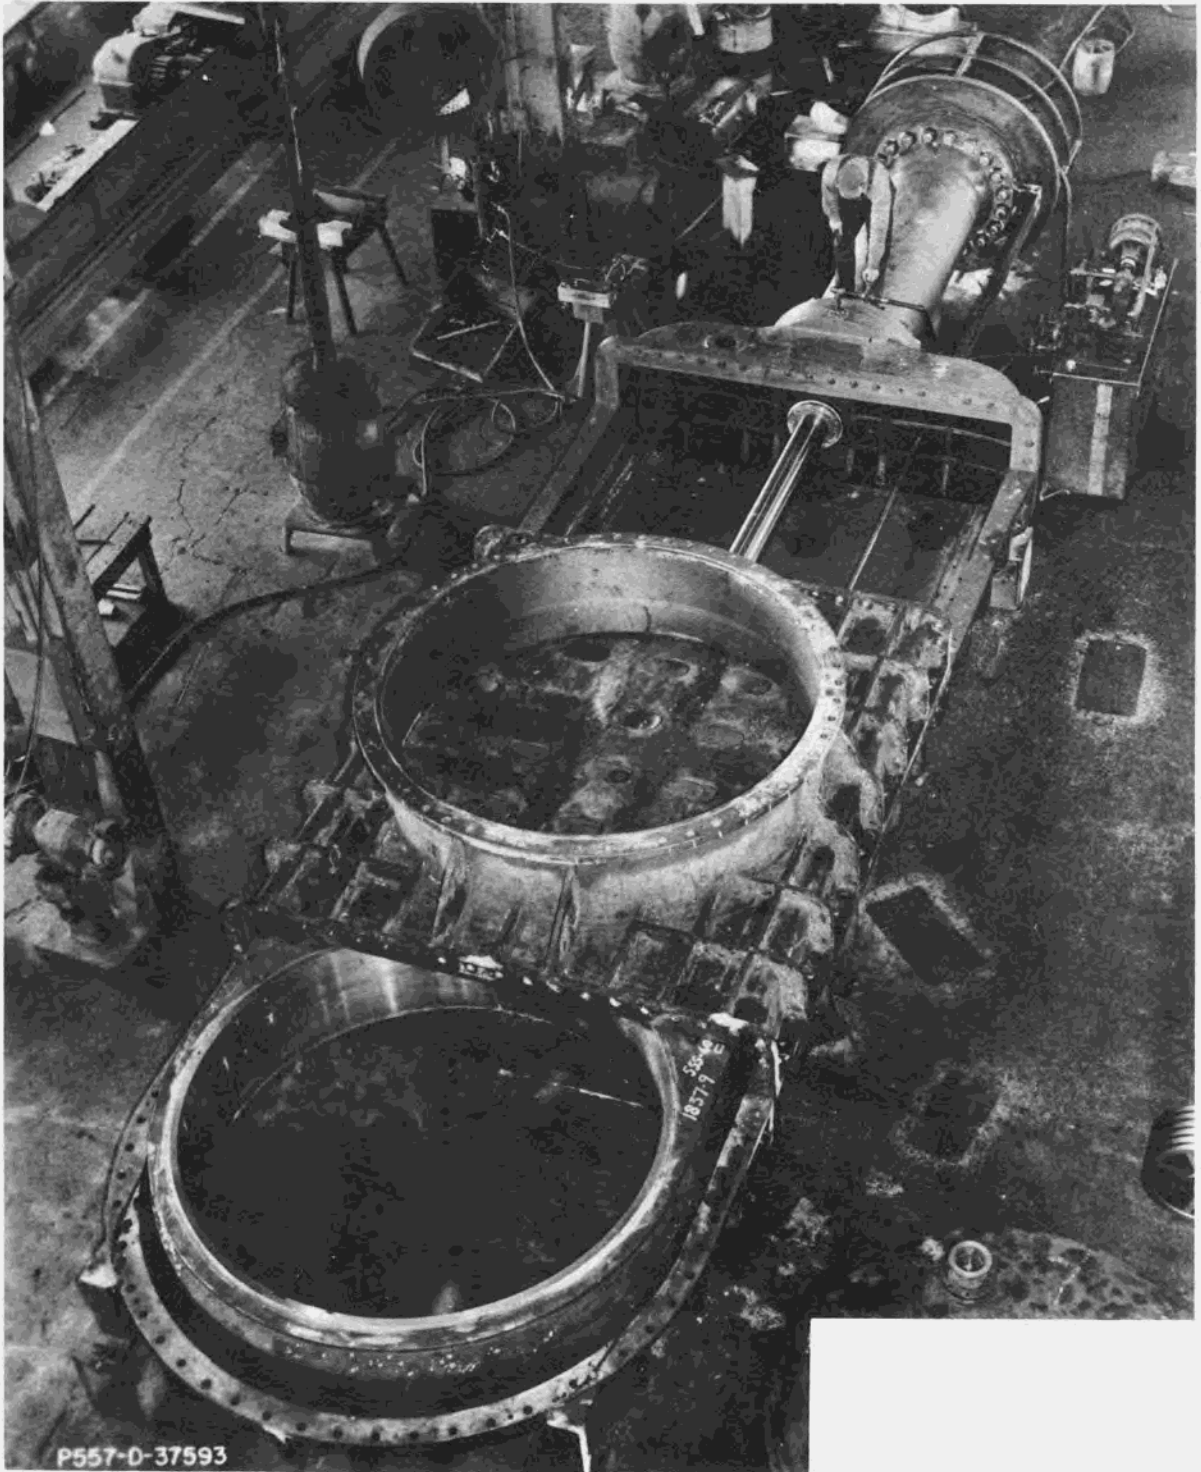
96-inch ring-follower gate. The gate is shown in a horizontal position in the shop with the upper and lower upstream bonnets removed and is in the process of being tested.
